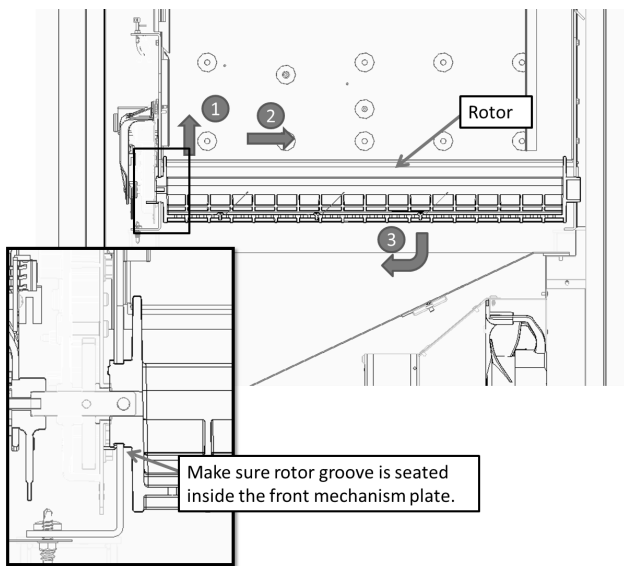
Rotor Removal and Reverse Order and Direction for Installation
